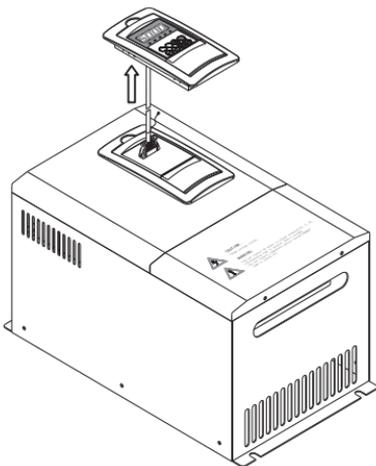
Mounting Diagram for the operator panel and connecting wire of the inverter Model B
